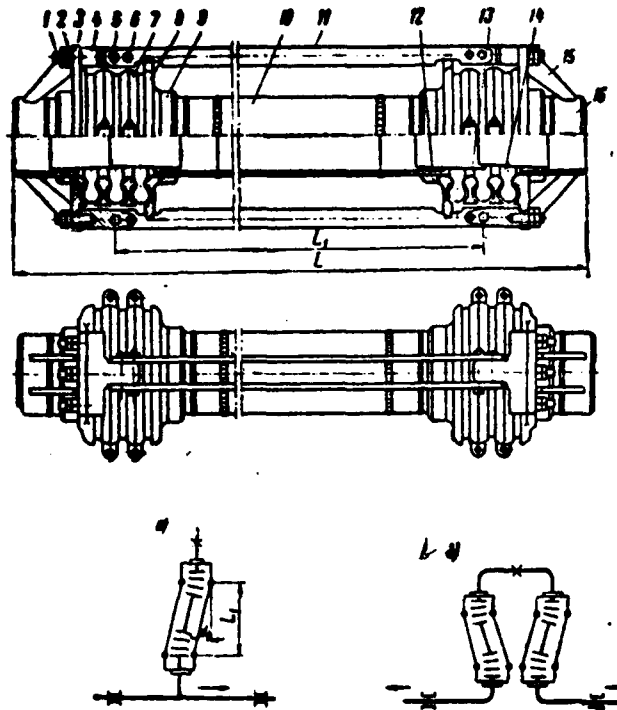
Compensator hinged doubled of the type KVSh. a) installation on the branch; b) installation in the U-shaped diagram; 1 - pins; 2 - nut; 3 - the carrier rings; 4 - link of the hinge joints; 5 - fulcrum; 6 - bolts; 7 - limiting semirings; 8 - the carrier rings; 9 - strip rings; 10 - spacer duct; 11 - draft (illegible); 12 - shell cylindrical; 13 - pliable corrugated elements/cells; 14 - conical shell; 15 - connection plate; 16 - branch connections.
